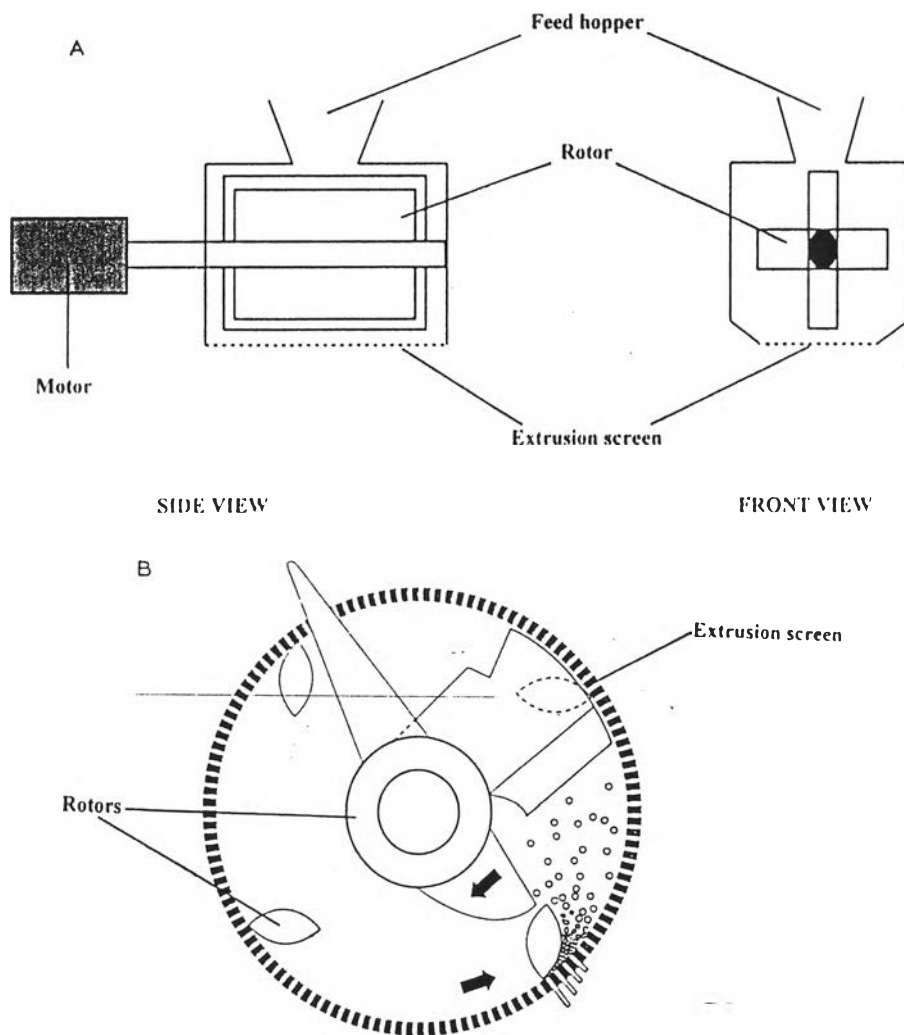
Schematic of a sieve extruder (A) and basket extruder (B)
